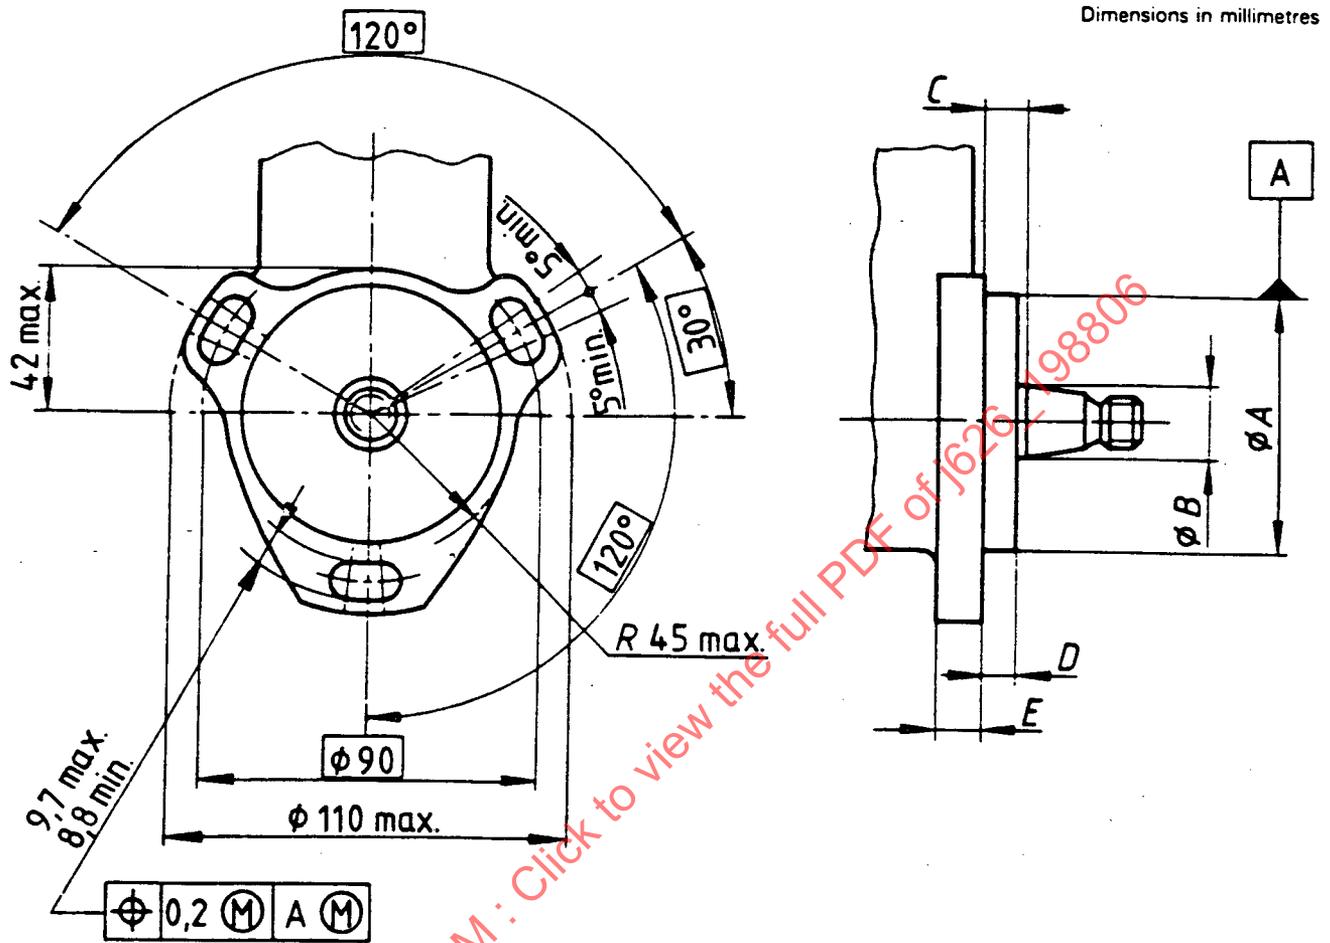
Fuel Injection Pumps - Type 4 End-Mounting Flange
